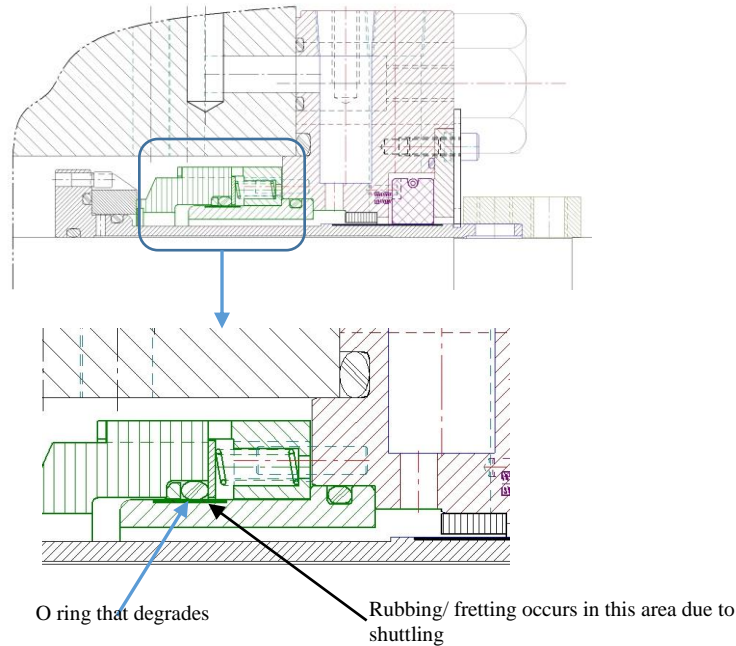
The O-ring (secondary seal) in a typical single pusher seal
